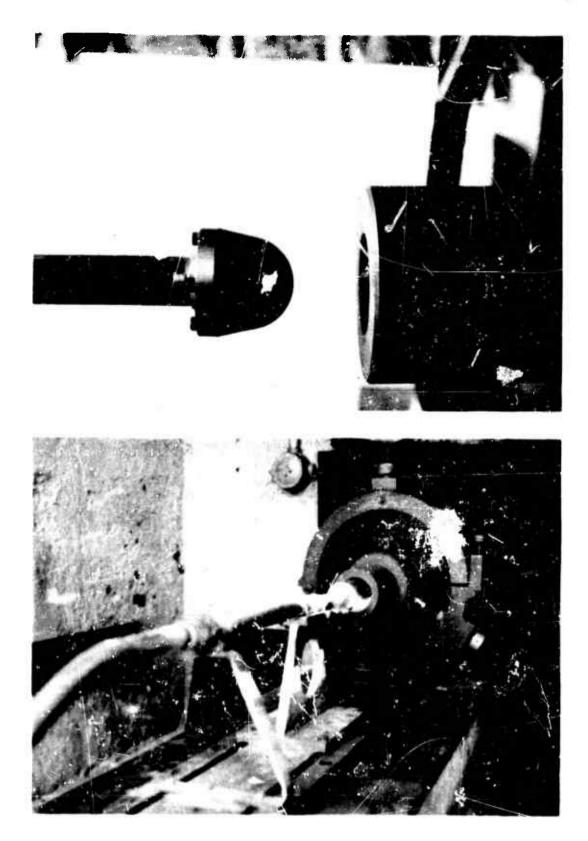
SPECIMEN HOLDER AND SUPPORT FIXTURE
